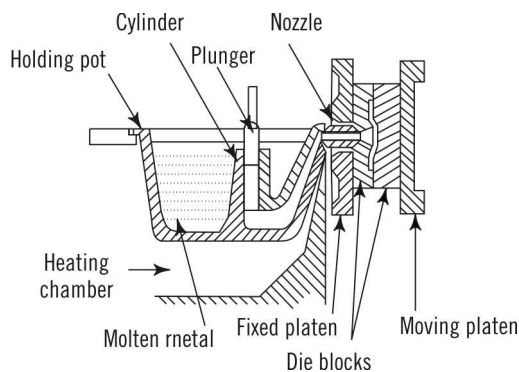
Plunger type hot-chamber die-casting Machine
